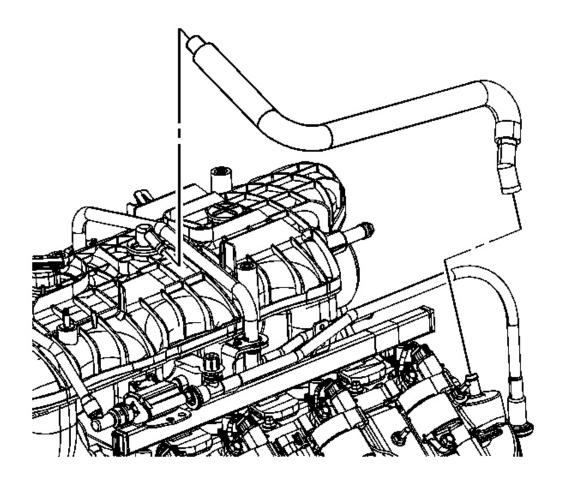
Identifying Positive Crankcase Ventilation (PCV) Foul Air Hose Courtesy of GENERAL MOTORS CORP.
